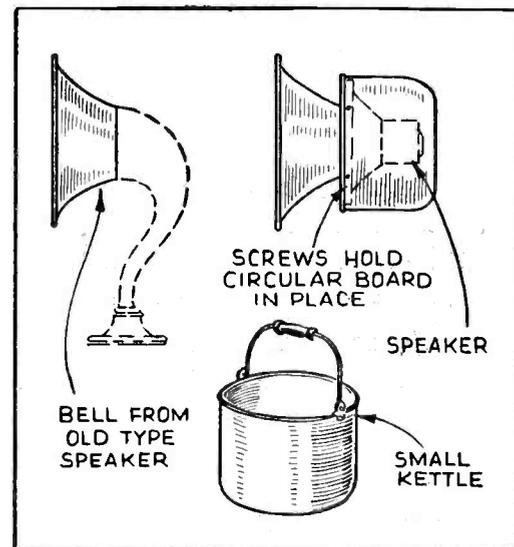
Bell of old horn-speaker and small kettle form modern portable speaker housing.
